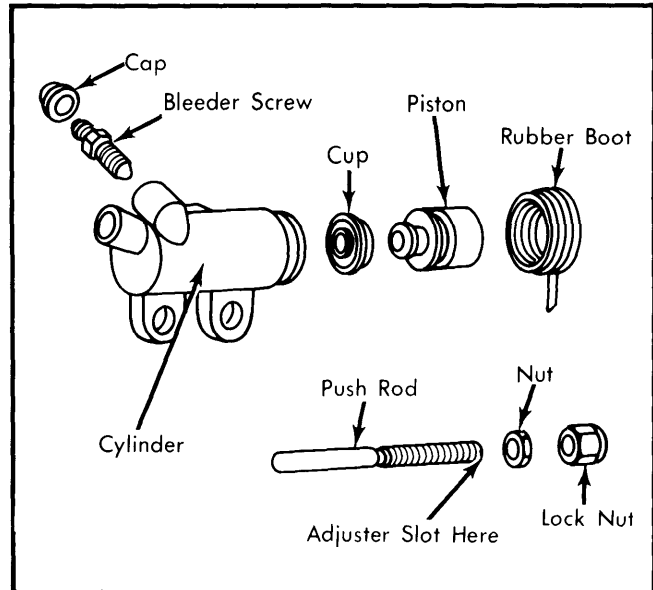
Exploded View of Slave Cylinder (4 x 4 Pickup Models Only)
